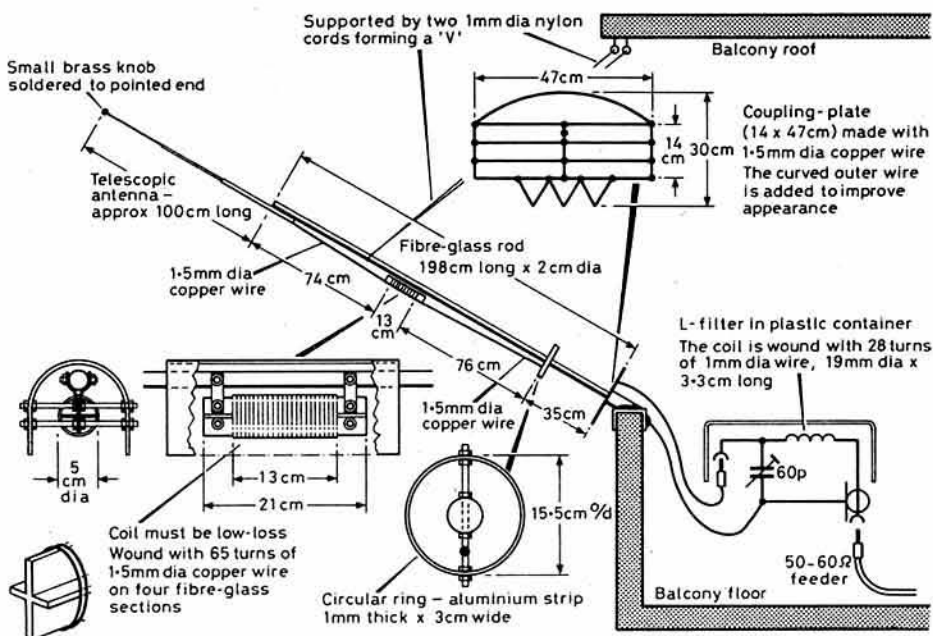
Constructional details of the DL6FY balcony-mounted mini-dipole
